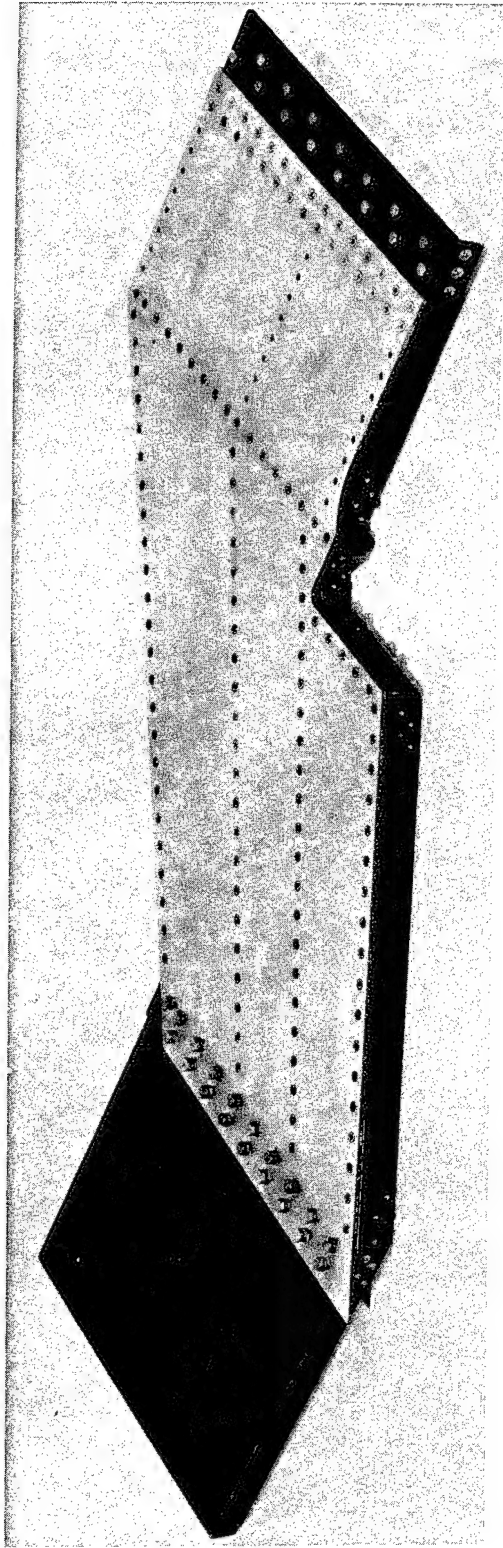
W B/AI WING SUBCOMPONENT FINAL ASSEMBLY
